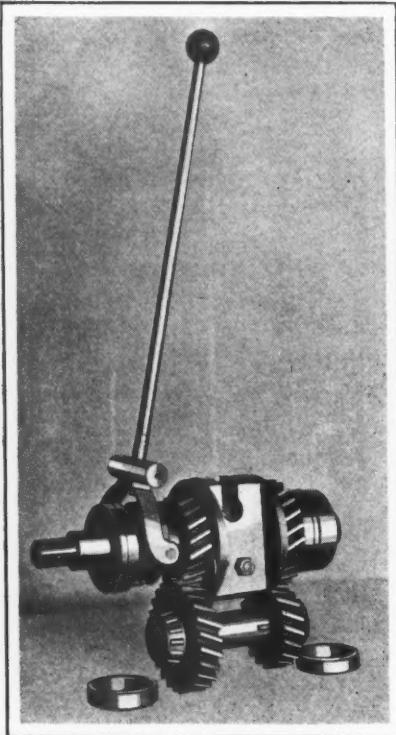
One Section of a Transmission Equipped with Roller Bearings and a Direct-acting Control Lever
